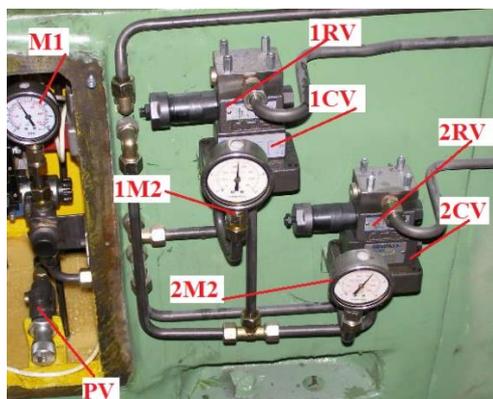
Hydraulic unit for balancing the two rams of the SC 33 vertical lathe
